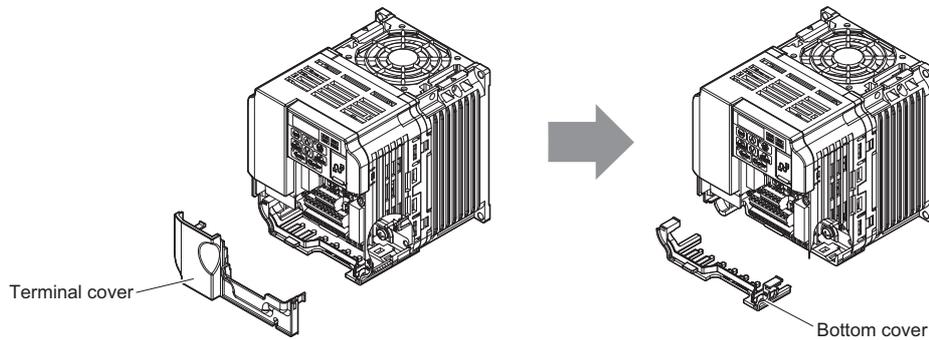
Remove the Terminal Cover and Bottom Cover on an IP20/Open-Chassis Drive (Models CIMR-V□BA0006B to BA0018B; 2A0008B to 2A0069B; 4A0001B to 4A0038B)
